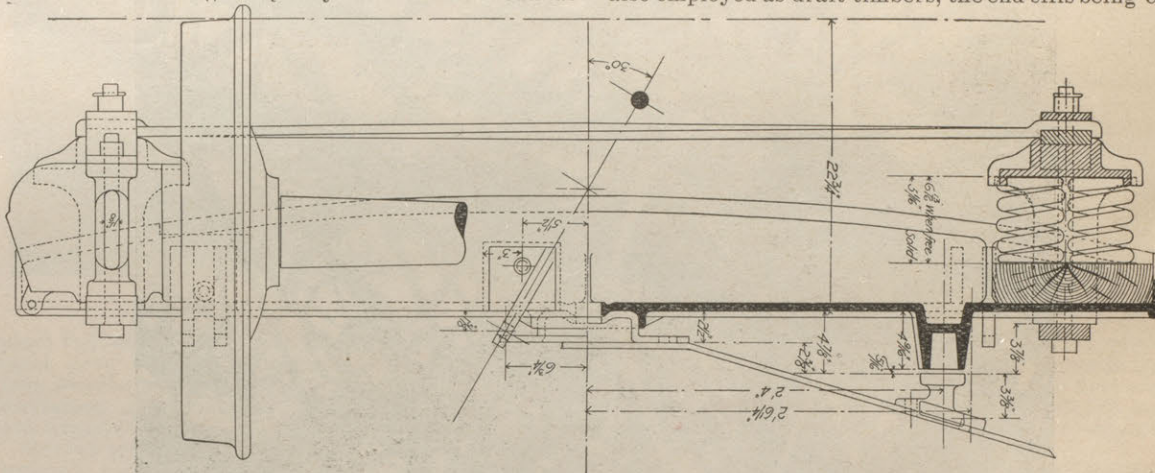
HALF SECTION AND HALF END ELEVATION OF TRUCK.
